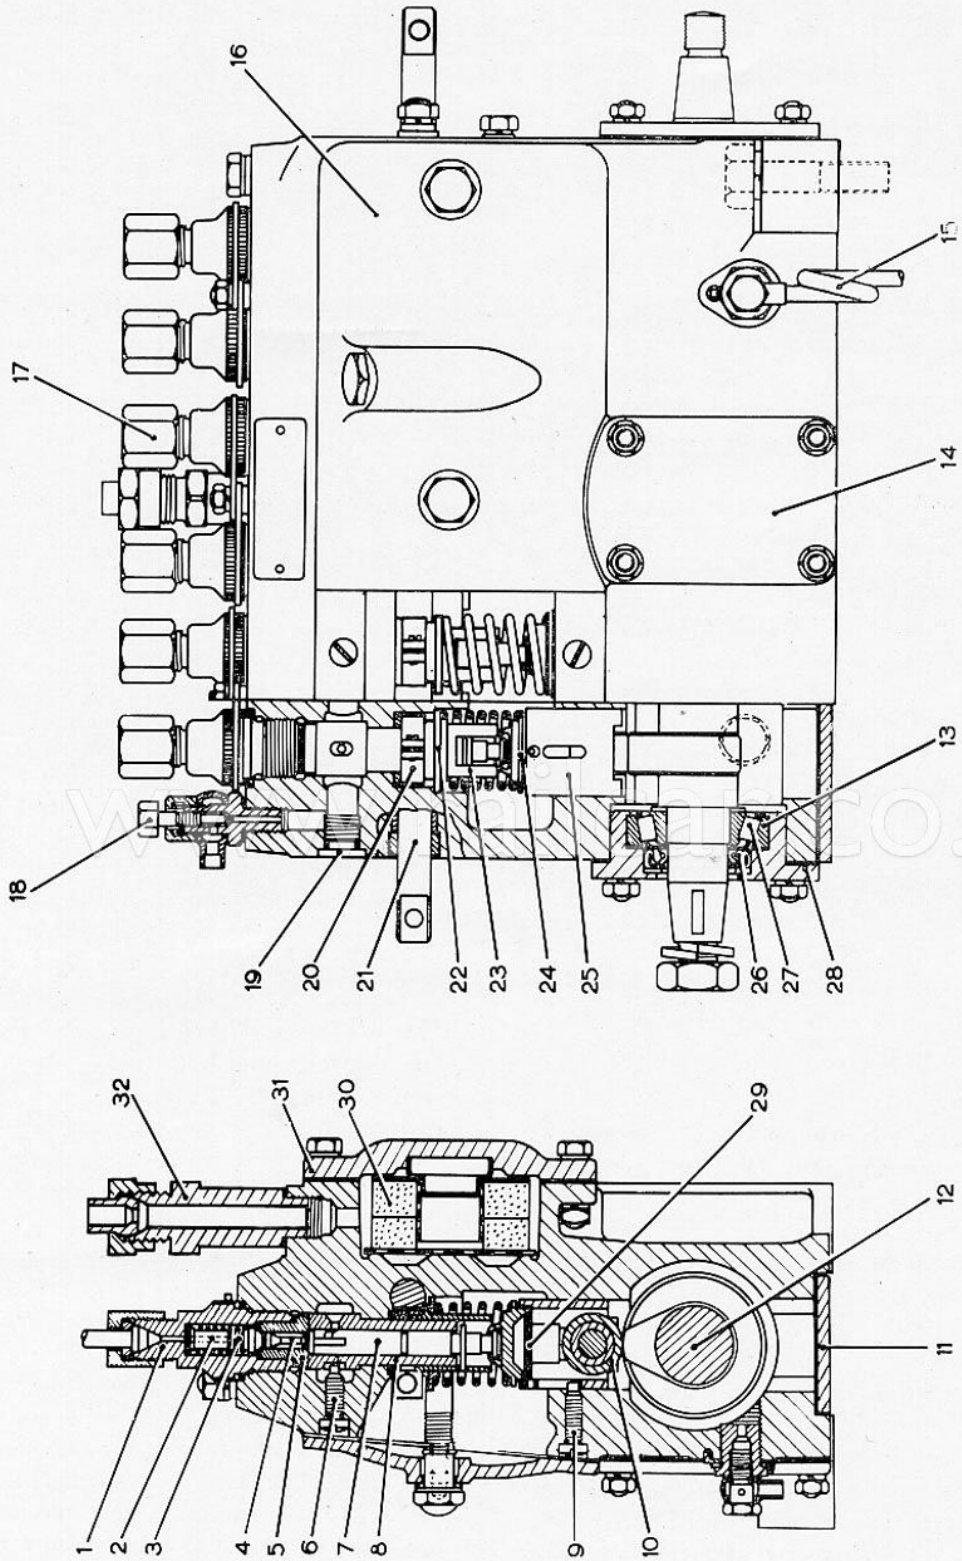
SECTIONED VIEWS OF TYPICAL 'NN' TYPE PUMP
